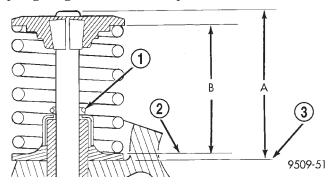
Checking Spring Installed Height and Valve Tip Height Dimensions
